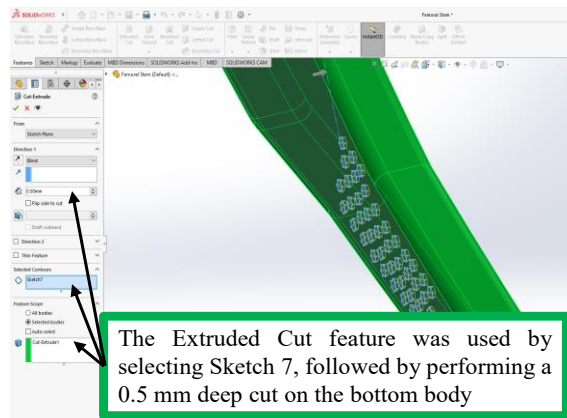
Creating hexagonal designs on the lateral surface of the lower body of the Femoral Stem using Extruded Cut
